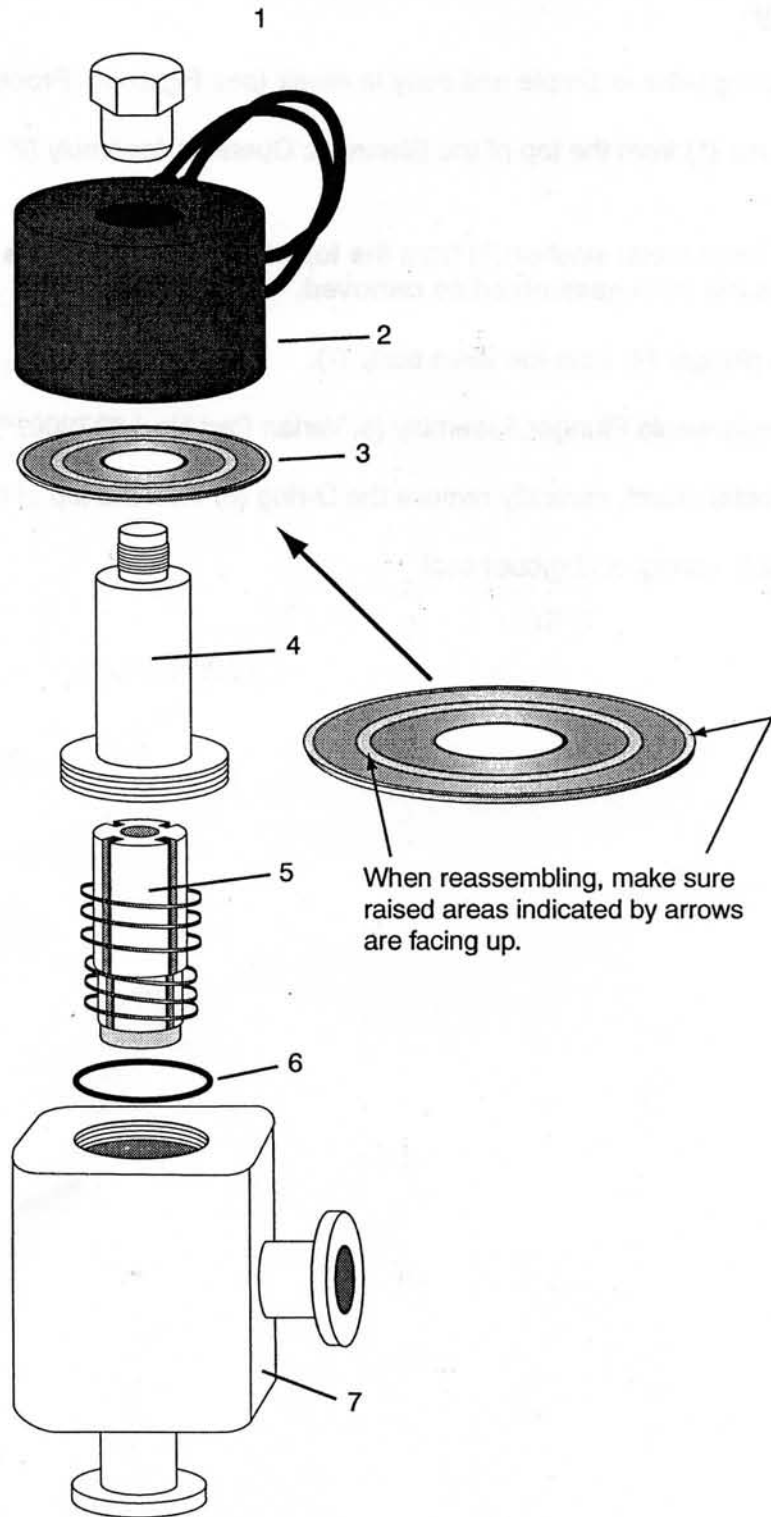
Exploded View, Directing-Acting Electromagnetic Block Valve
